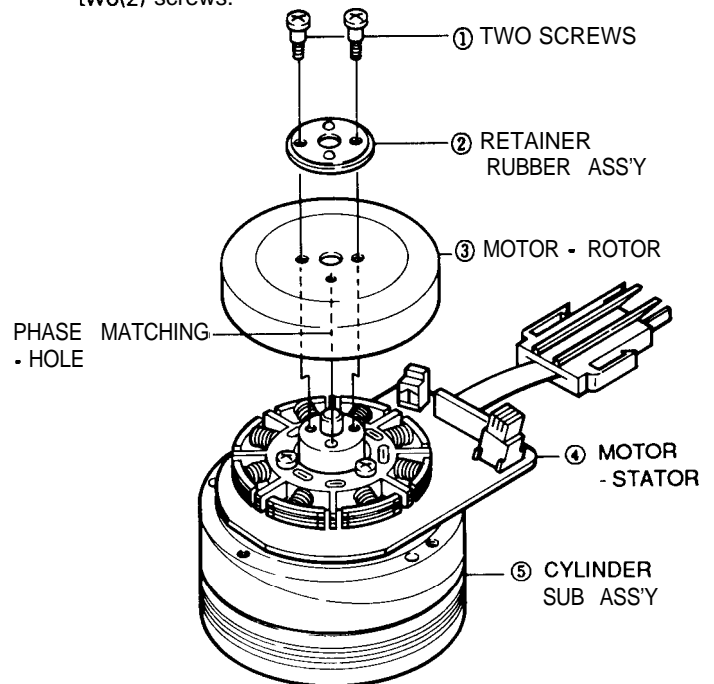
Assembly of Motor Rotor & Cylinder Sub Ass'y
